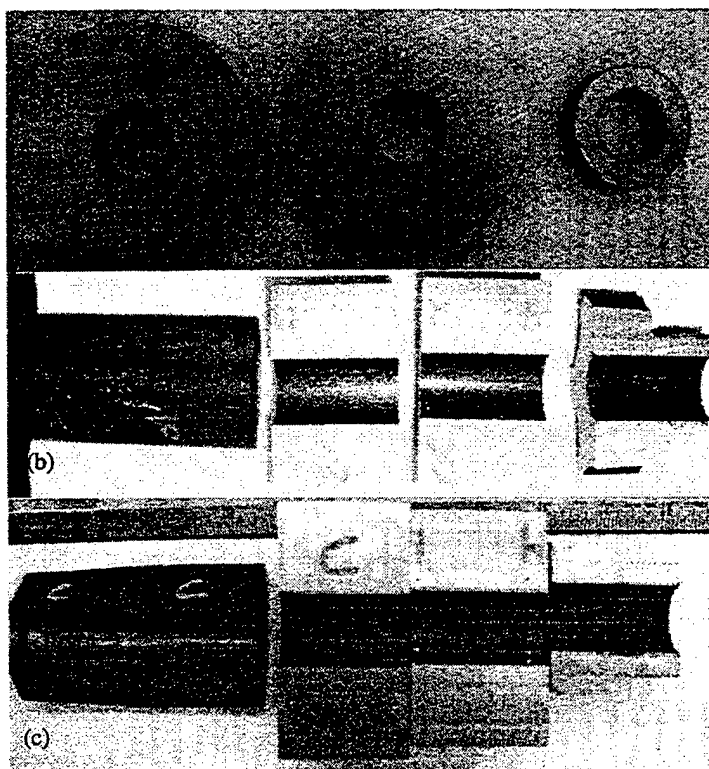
As-received sections of (a) Tube A, (b) Tube B, and (c) Tube C.
